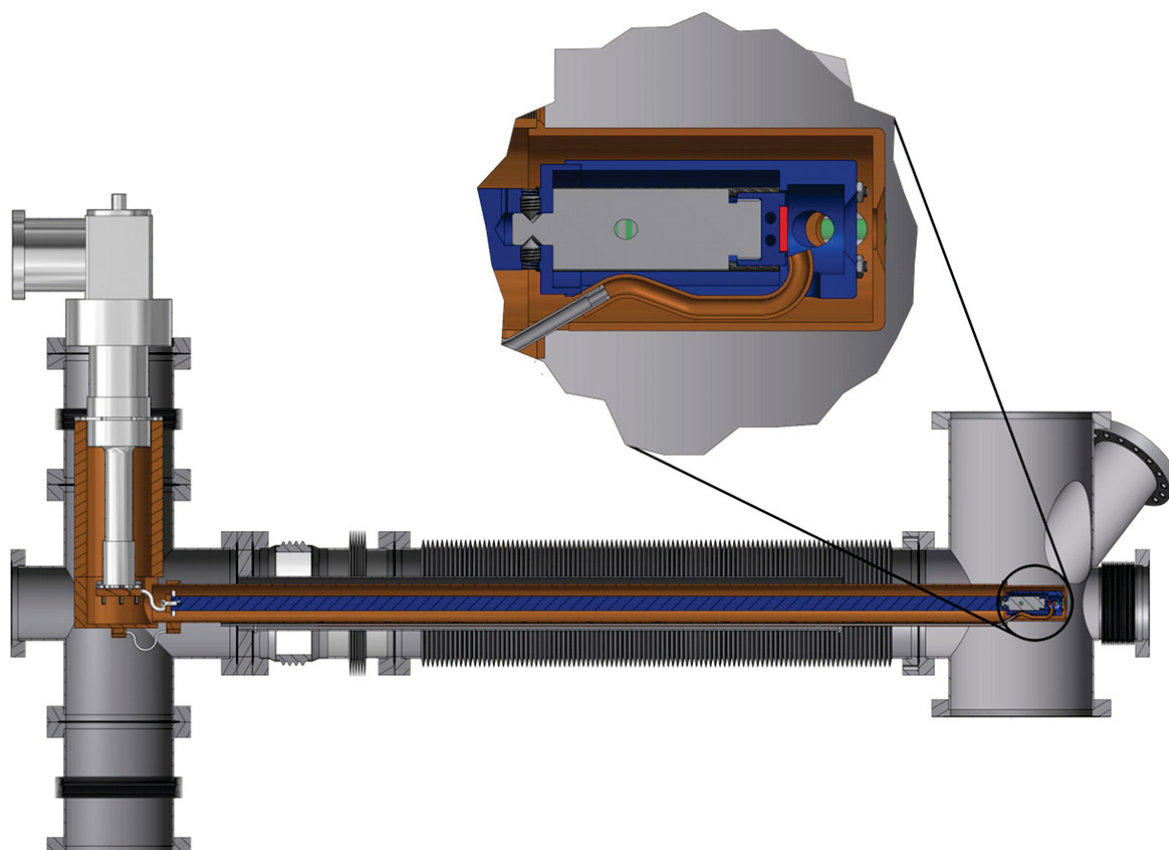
CAD drawing of the inner parts and vacuum system of the recent set-up at IKP Münster. Shown is the vacuum chamber (gray), the cryocooler (silver), the outer cold shield (copper) and the cold finger and inner cold shield (blue). The inset shows a magnification of the substrate region with stainless steel part (gray) to reduce the thermal conductivity and the nozzle (copper) for the krypton gas. The substrate is marked in red.
